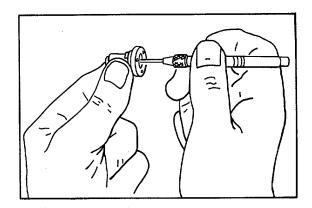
Cleaning Injector Spray Tip with Tool J 24838
